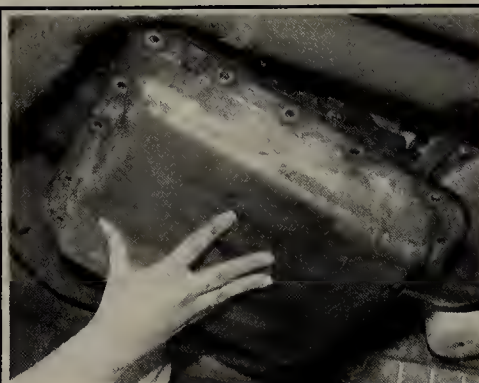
Remove the remaining bolts, then carefully lower the pan and dump any remaining fluid in a suitable container
